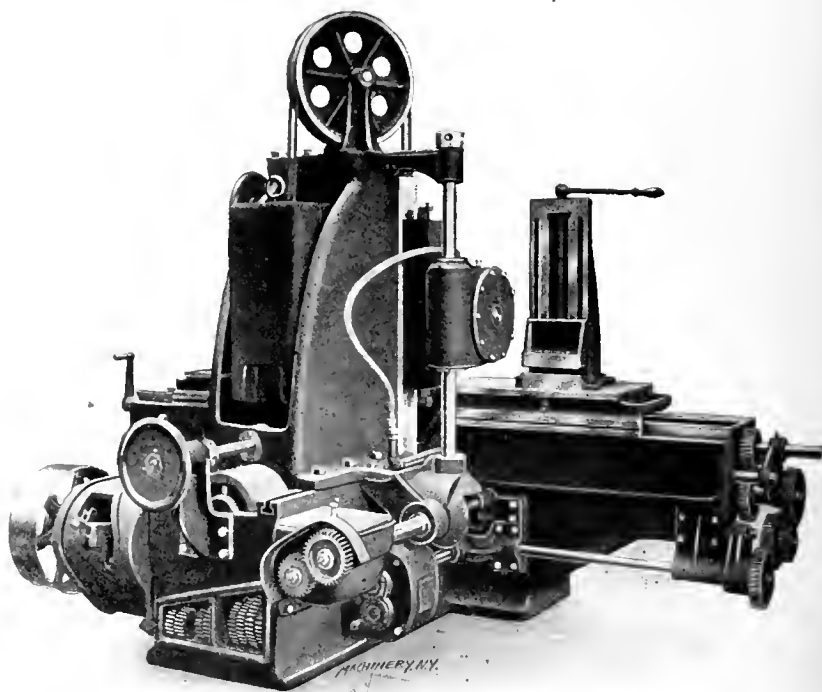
Rear View of the Machine, showing Single-speed Drive, Quick-change Gear Feed, Indexing Mechanism, etc.
